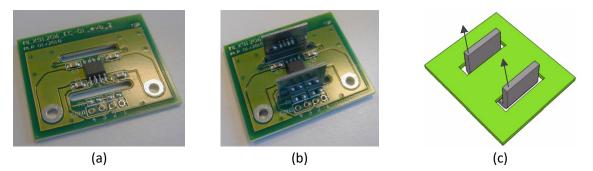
Single-layer evaluation board (a) without and (b) with shield. (c) Assembly instructions for shield.
